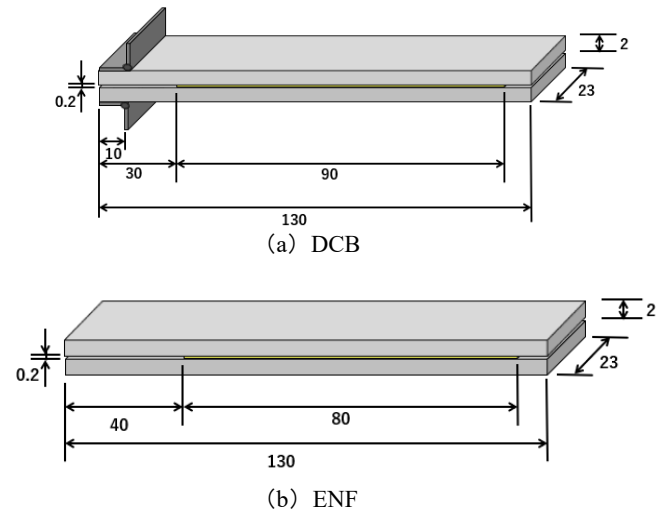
Configurations of specimens used in fatigue crack propagation tests (in mm)
